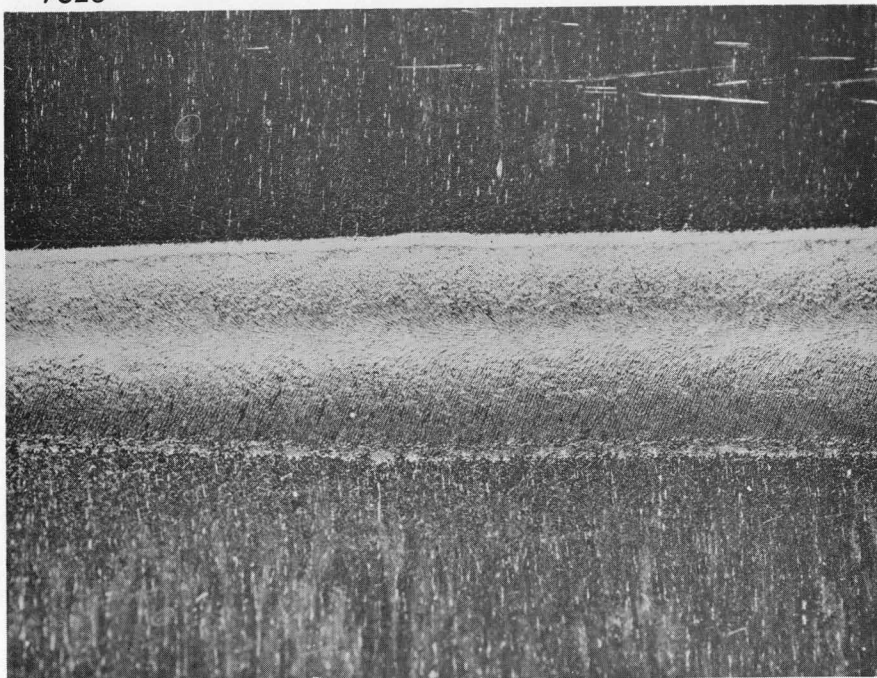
Electron Beam Weld Bead on V-15Cr-5Ti Sheet
